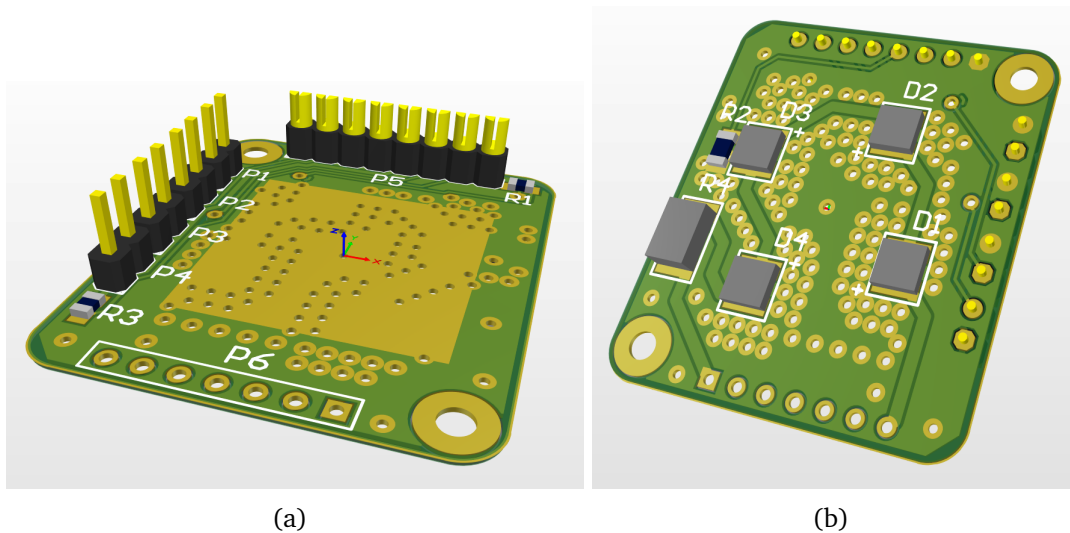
(a) 3D top-view of the LED-PCB (b) 3D bottom-view of the LED-PCB
